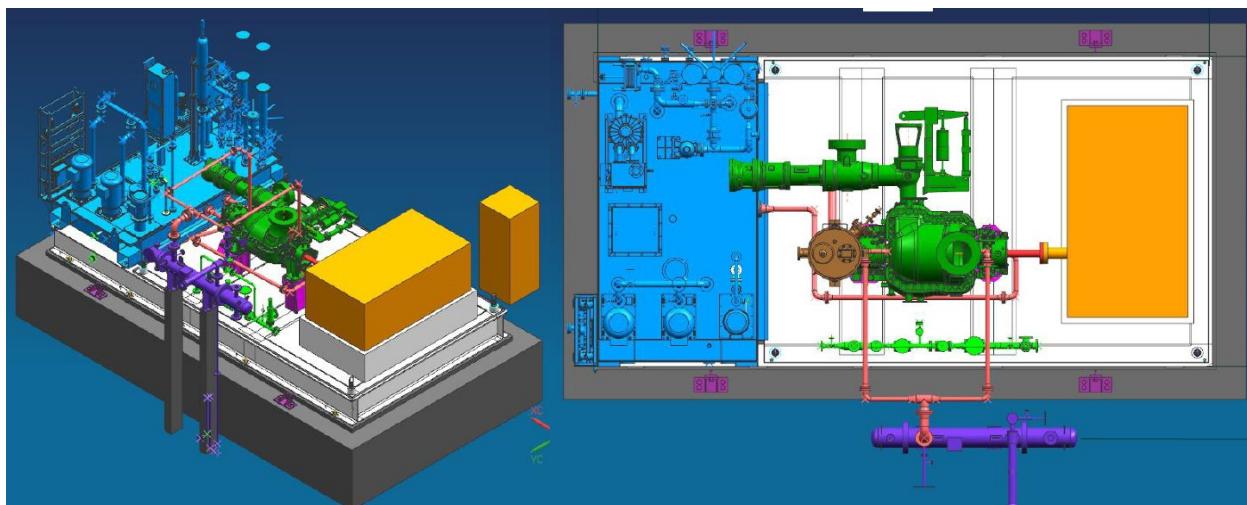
Isometric (left) and Overhead (right) Layout of the Turbo-expander Equipment
